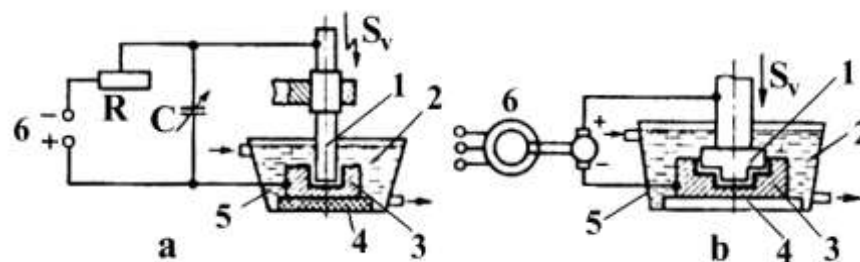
Electric spark (a) and electric pulse (b) machining: 1 – tool (electrode); 2 – dielectric liquid; 3 – workpiece; 4 – dielectric bottom; 5 – container; 6 – impulse generator; R – electric resistance; C – condenser
